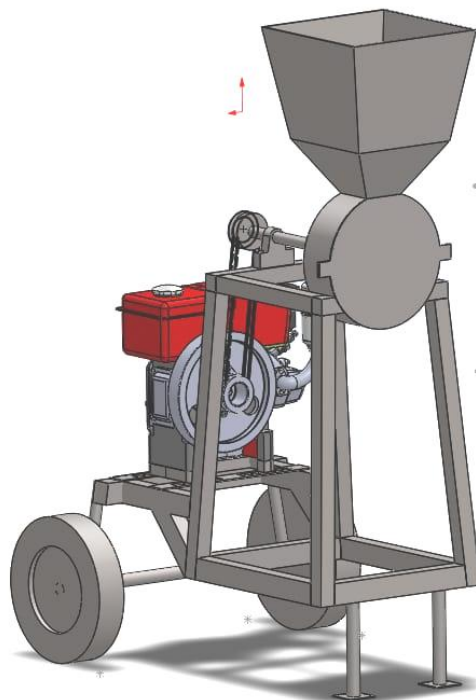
The modeled assembled drawing of the fabricated palm kernel cracking machine.
